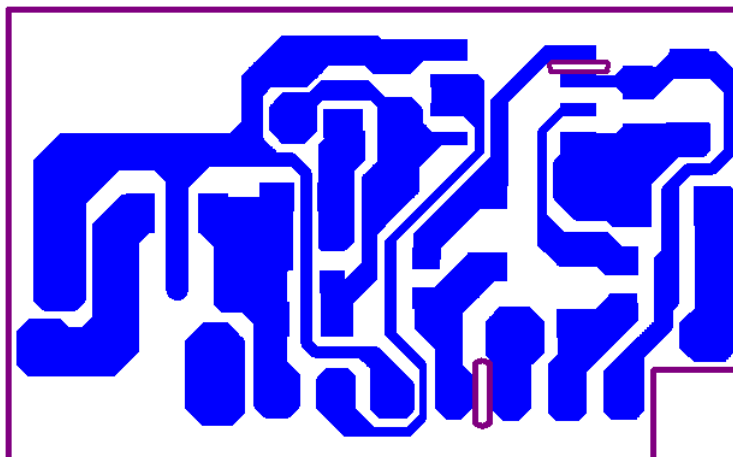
Evaluation Board Layout (Daughter Card), Bottom Layer
